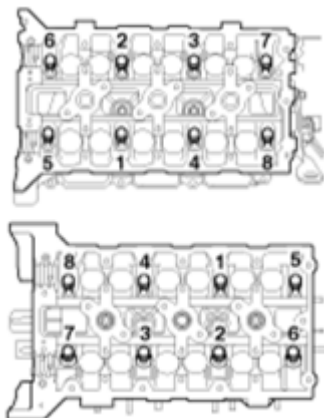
Identifying Cylinder Head Bolts Installing Sequence
